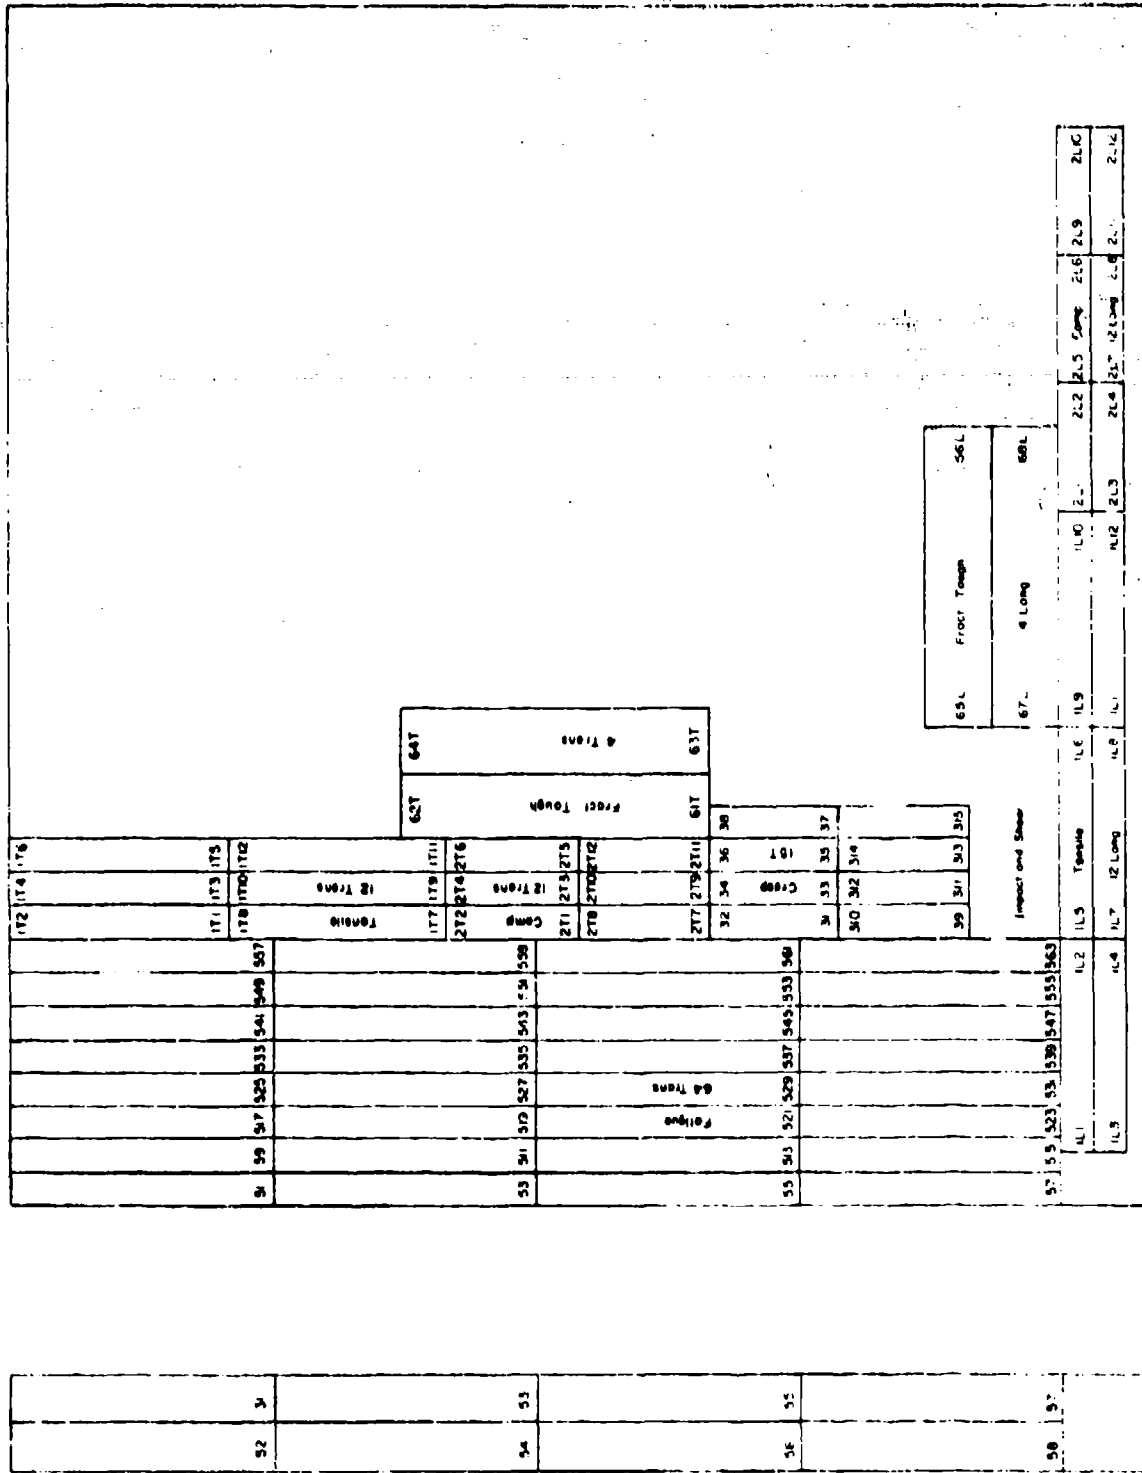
SPECIMEN LAYOUT FOR 7050-T73651 PLATE
